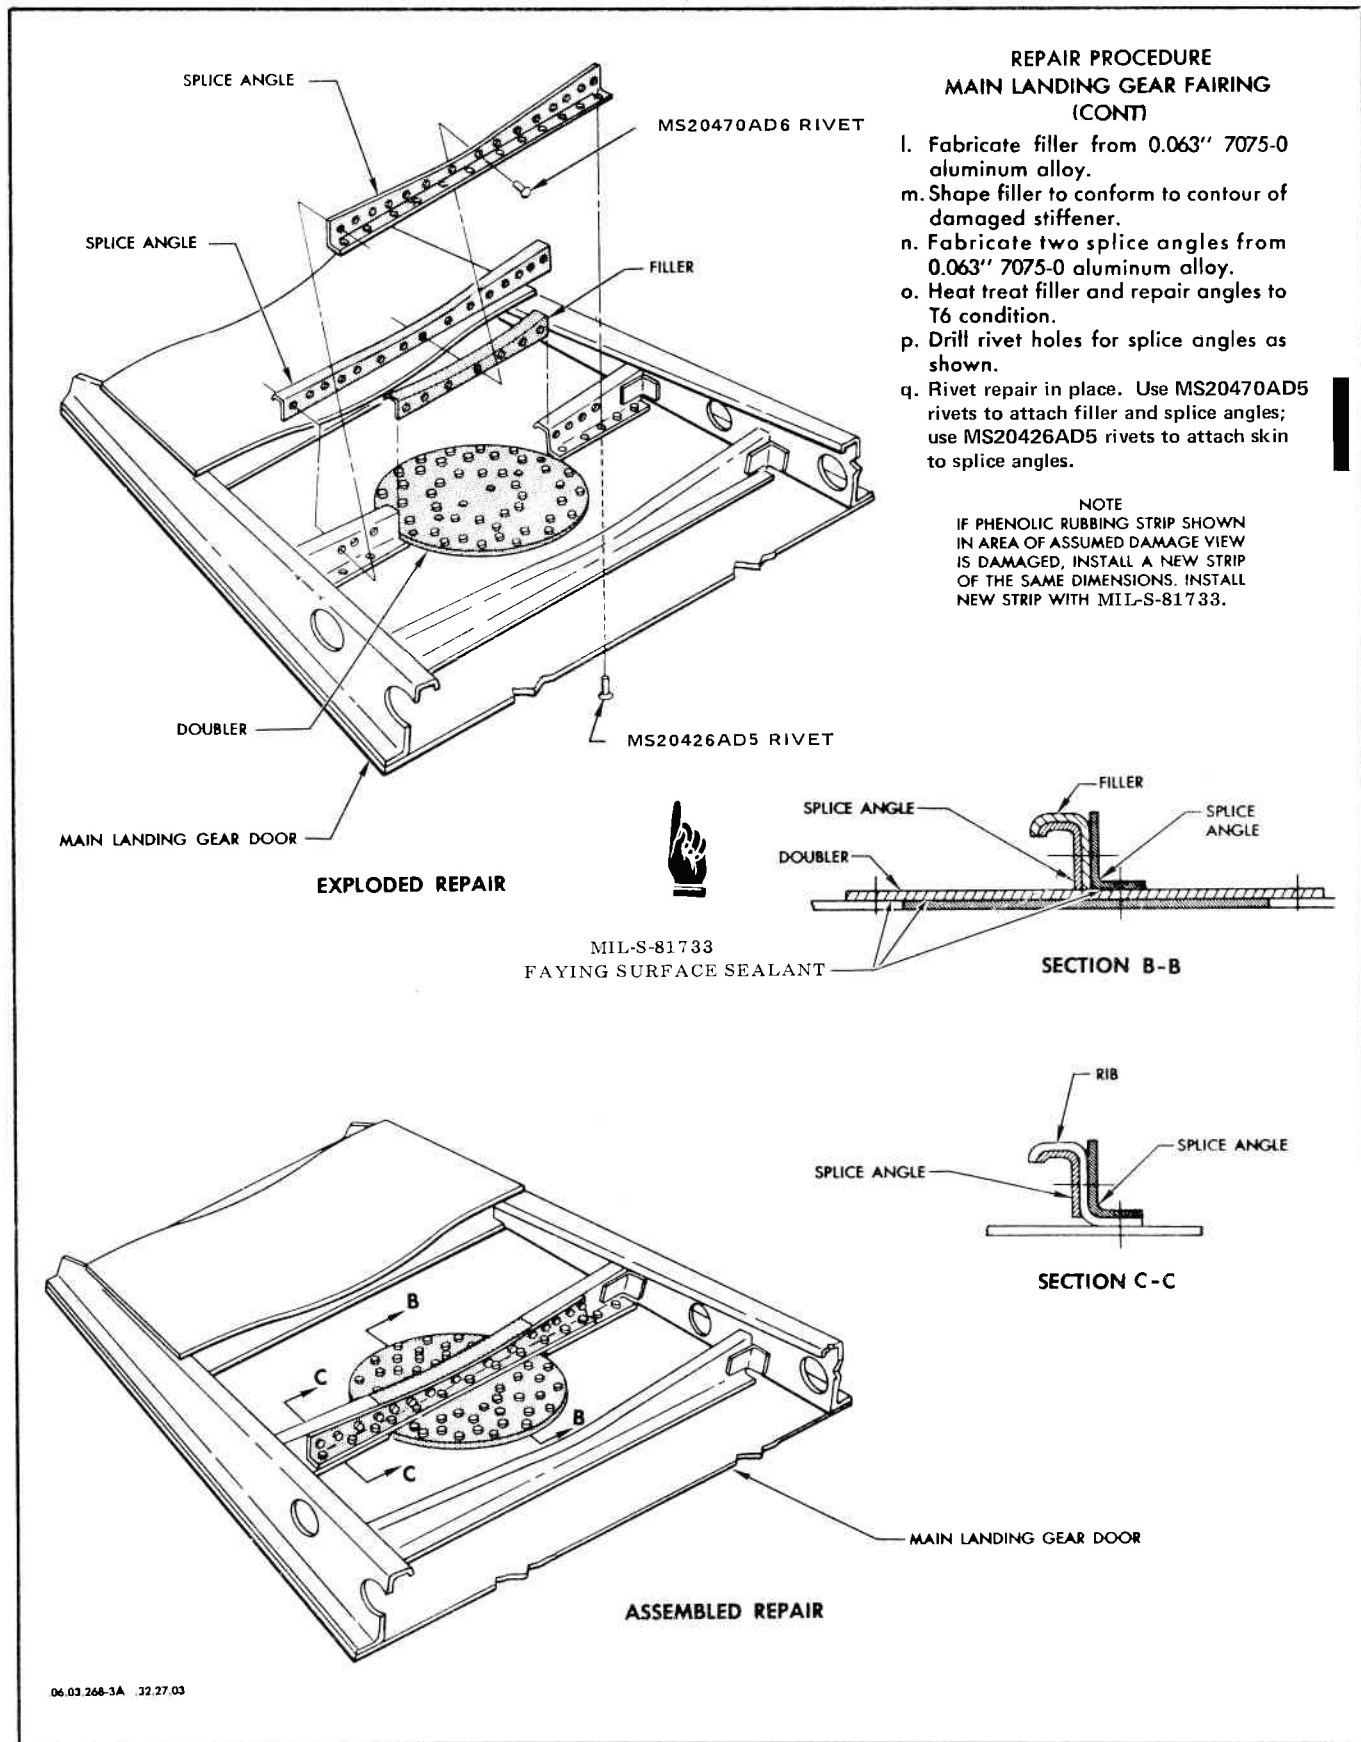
Main Landing Gear Fairing Repair (Sheet 3 of 3)
